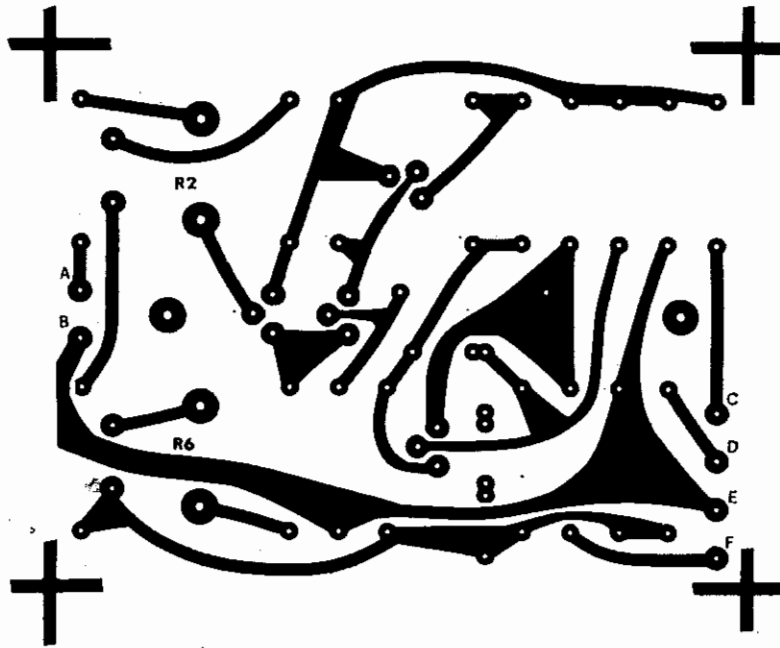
Actual size printed circuit foil pattern. The marks at the corners are for board dimensions. The two mounting holes are shown along the center line.
